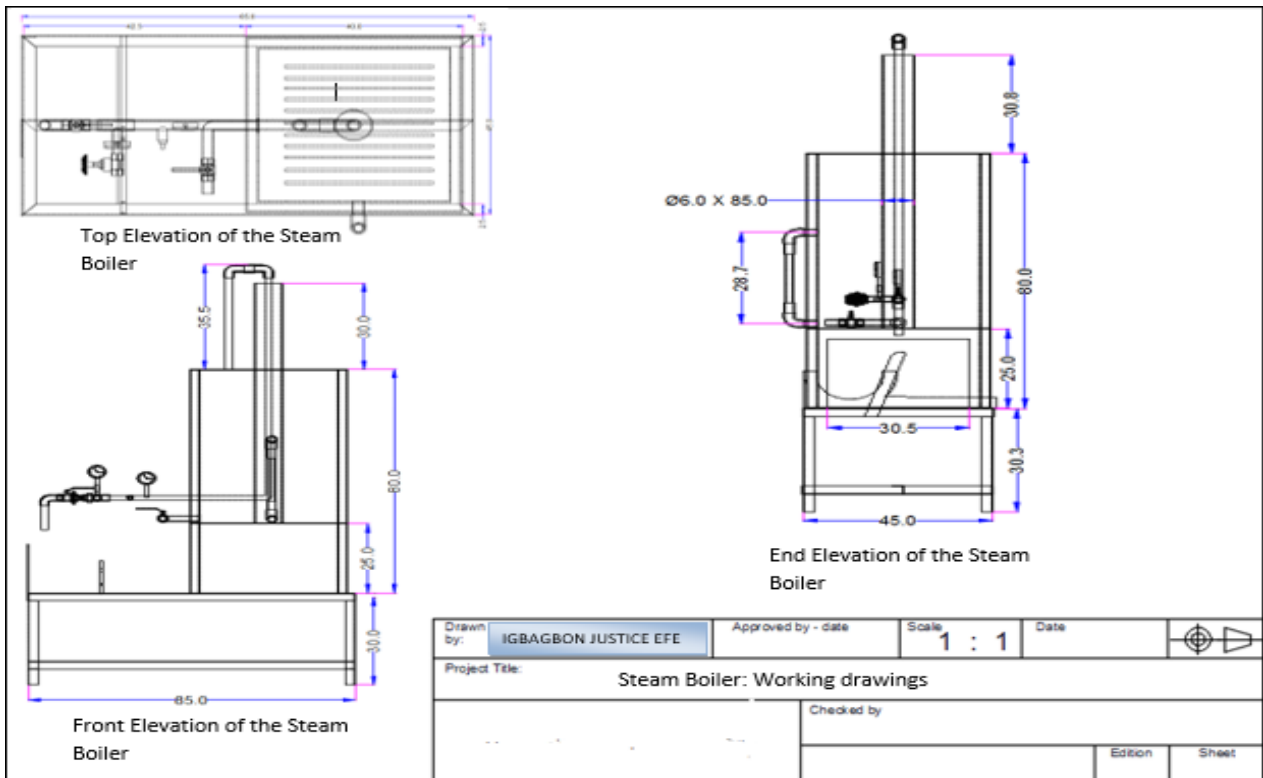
Working drawing of the miniature steam boiler for generation of steam
